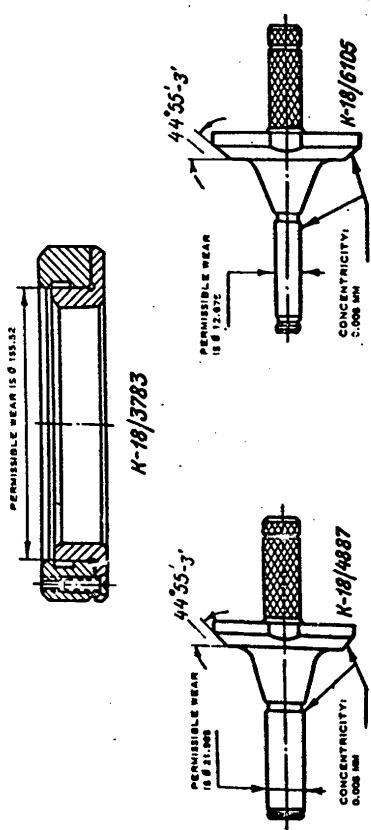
GAUGES FOR SELECTING PISTON RINGS AND FOR CHECKING CONCENTRICAL ALIGNMENT OF VALVE GUIDE HOLES WITH VALVE SEAT FACE
